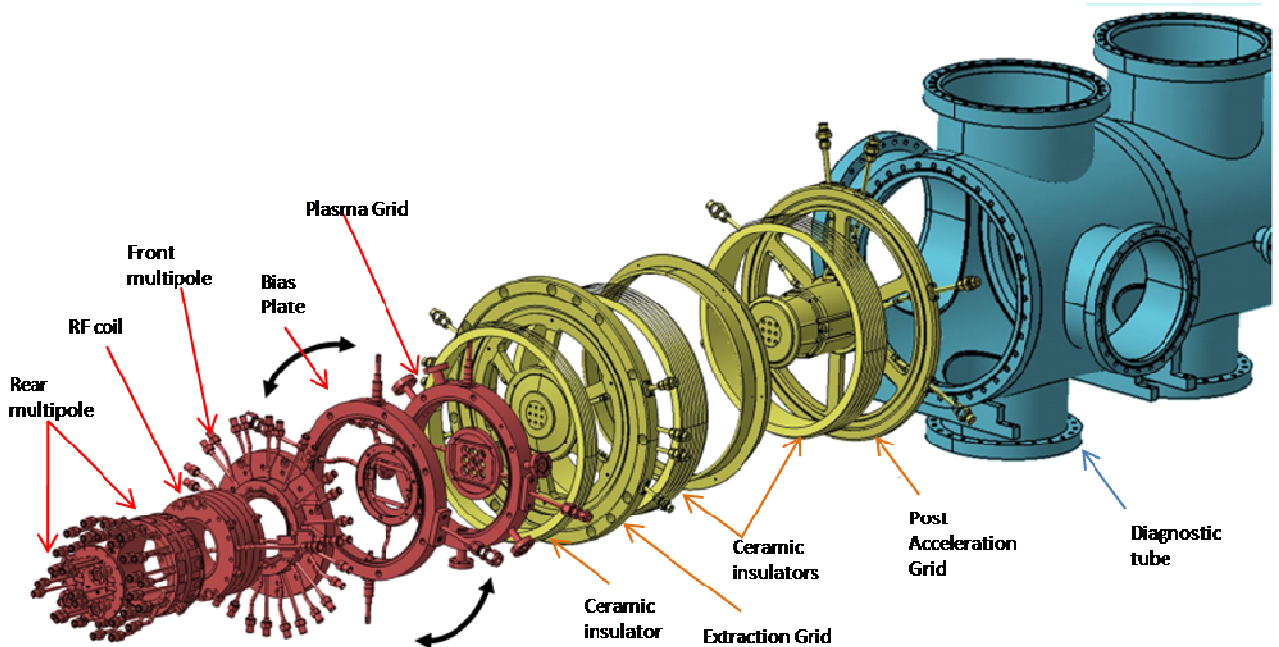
NIO1 Exploded view drawing of NIO main components.
